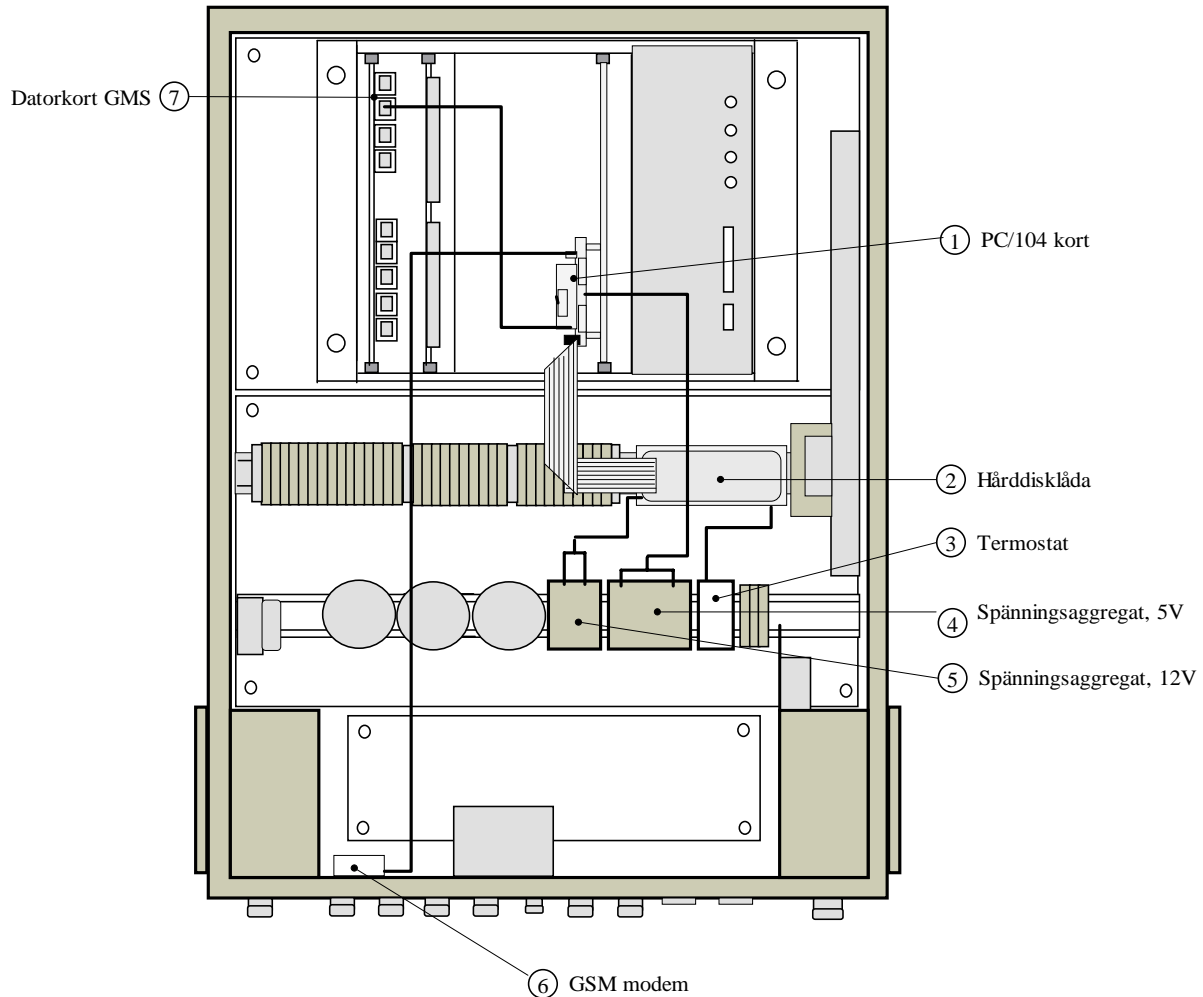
Drawing of GMC control cabinet indicating location of control parts
